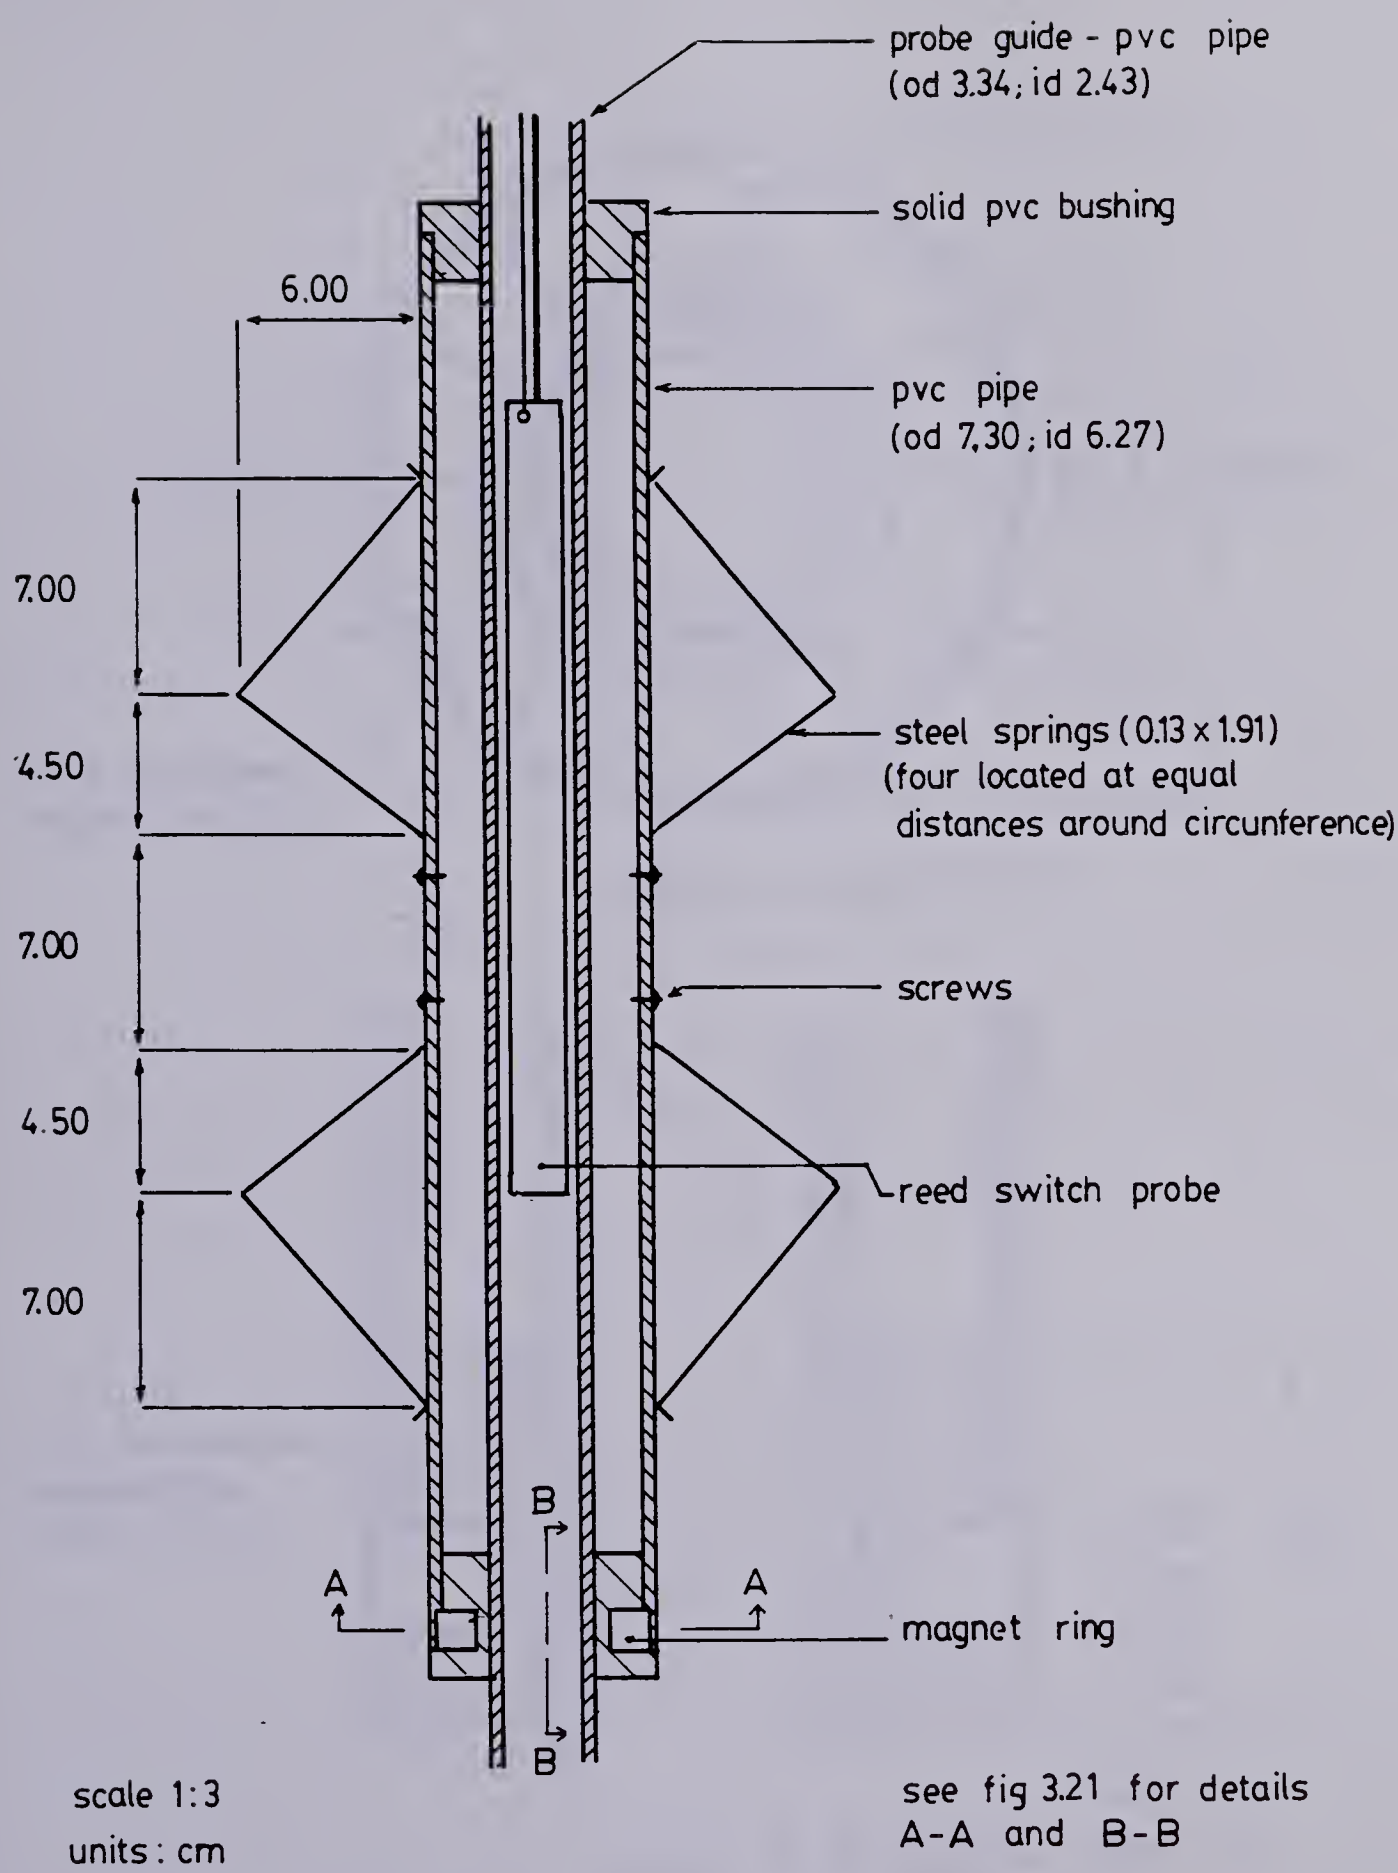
MAGNETIC MULTIPOINT EXTENSOMETER - ANCHOR POINT
